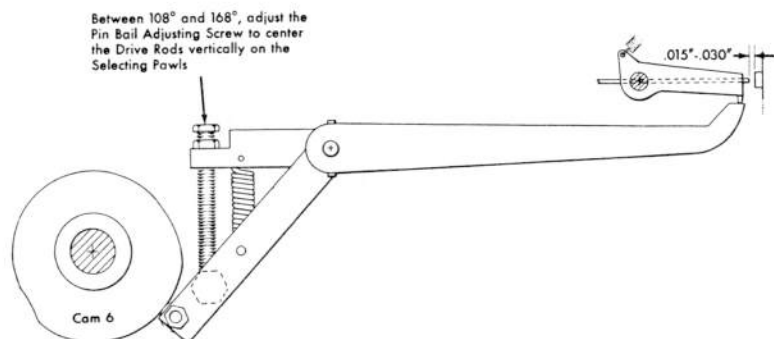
Drive Rod Clearance and Pin Bail Adjustment
